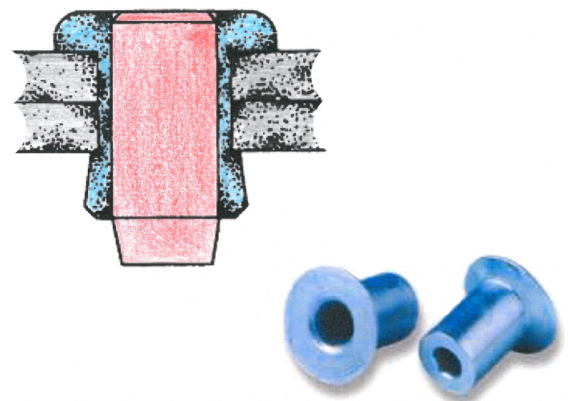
The sketch above shows a cross section of a Chobert rivet in place securing two separate pieces of material; note that the rivet is shaded blue (as are the unformed rivets shown below right), the sealing pin, essential in the rivets used in the AOP.9 aileron operating rod, is shaded red.
